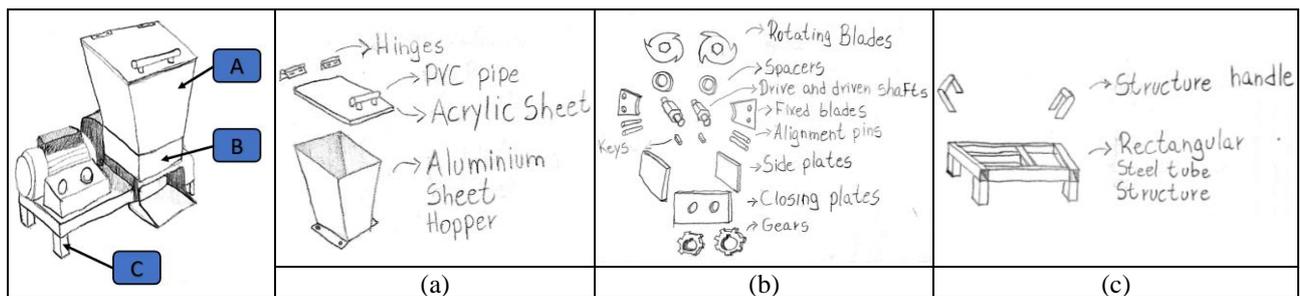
Sketch of Design B and detailing of its feeding unit, shredding unit and structure.
